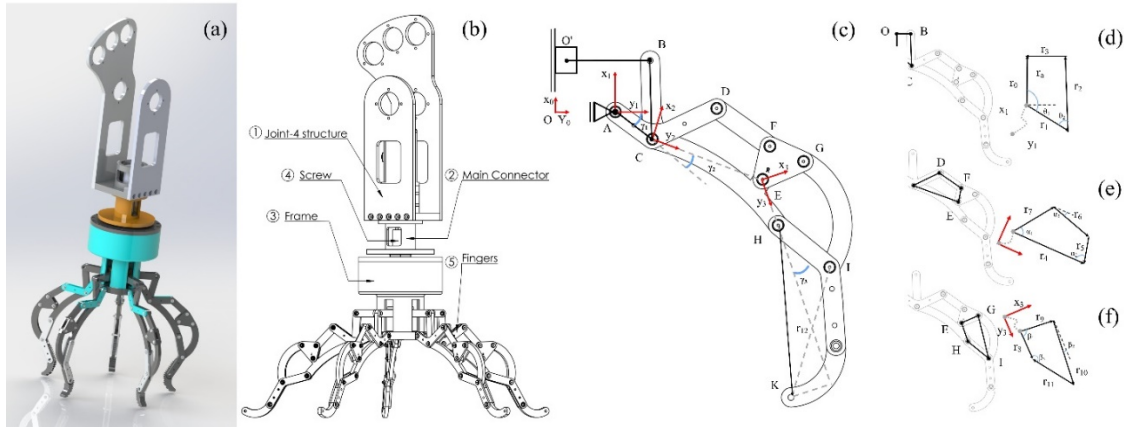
(a) CAD designed end-effector, (b) EE's units (c) finger linkage, (d) A- mechanism, (e) B- mechanism, (f) C-mechanism
